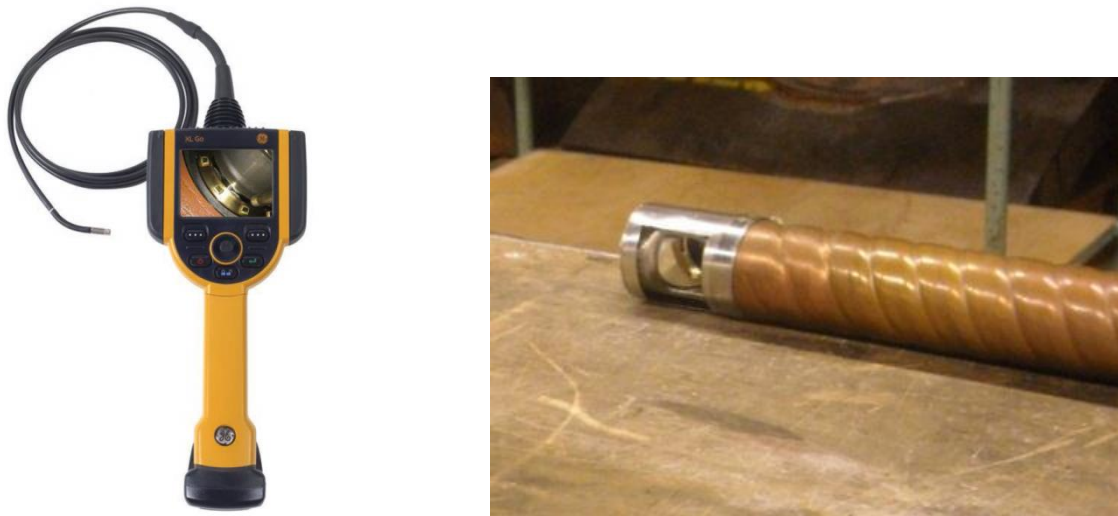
Left: commercial borescope. Right: in-house developed water-cooled borescope for inspection of combustion chambers (boilers)
